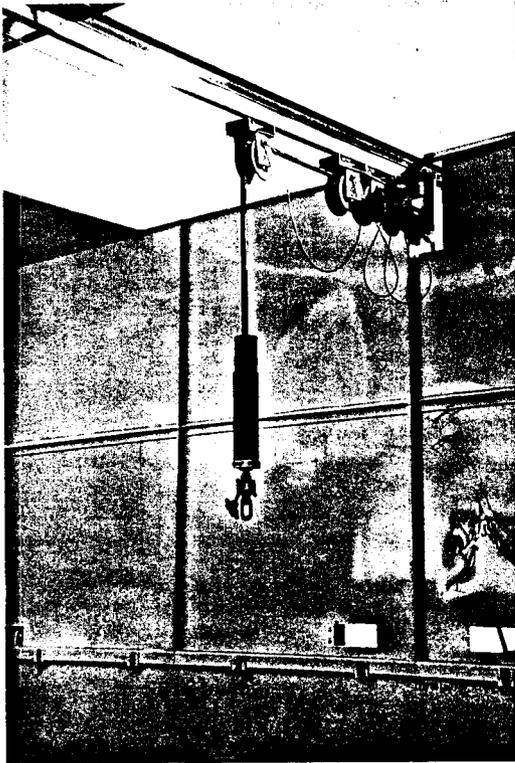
(b) - Rotary tooling suspended on end of hose, with roller arrangement for positioning tool in "x" and "y" directions.
